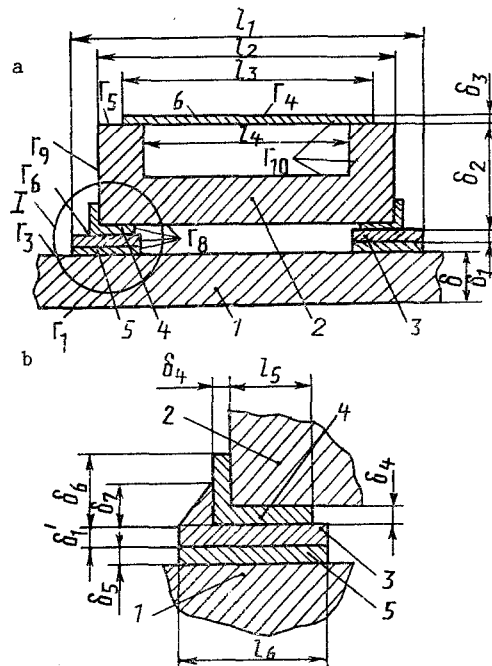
Formulation of the problem: a) general view of PE; b) solder joint; 1) printed-circuit board; 2) frame base; 3) solder; 4) output; 5) contact area; 6) lid of frame.
